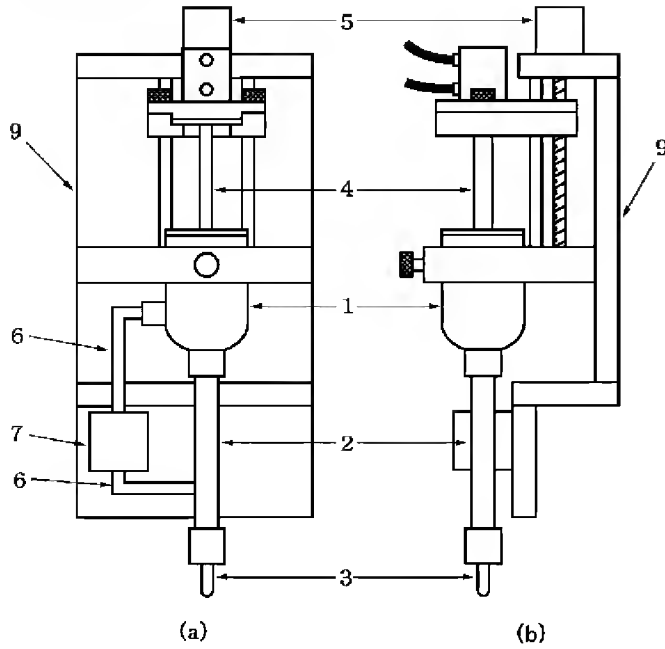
It is the important section sectional view of the work example shown in drawing 3 .
